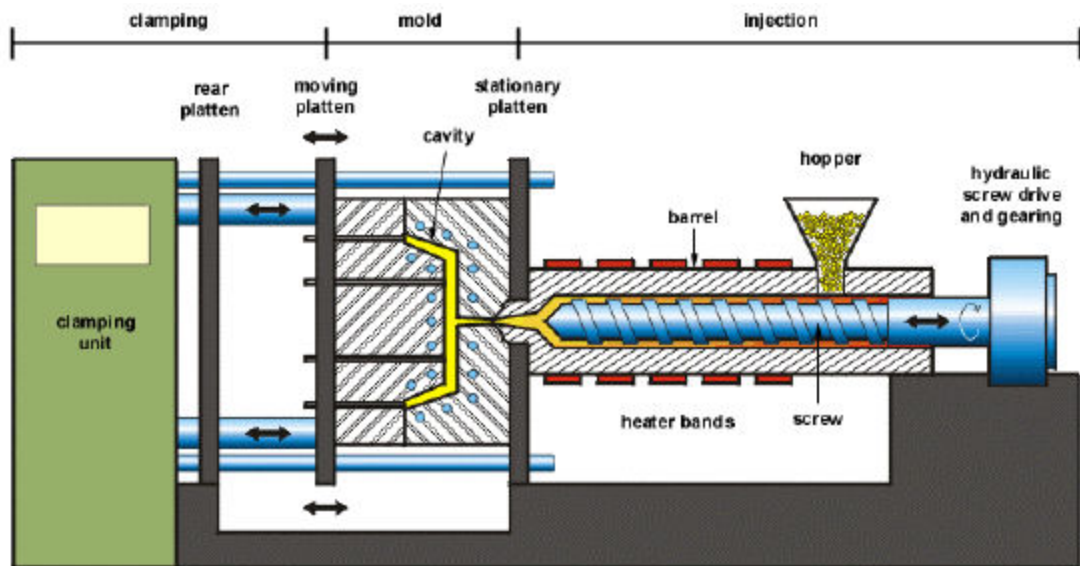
Typical injection molding machine: the injection, the mold and clamping unit [2]
